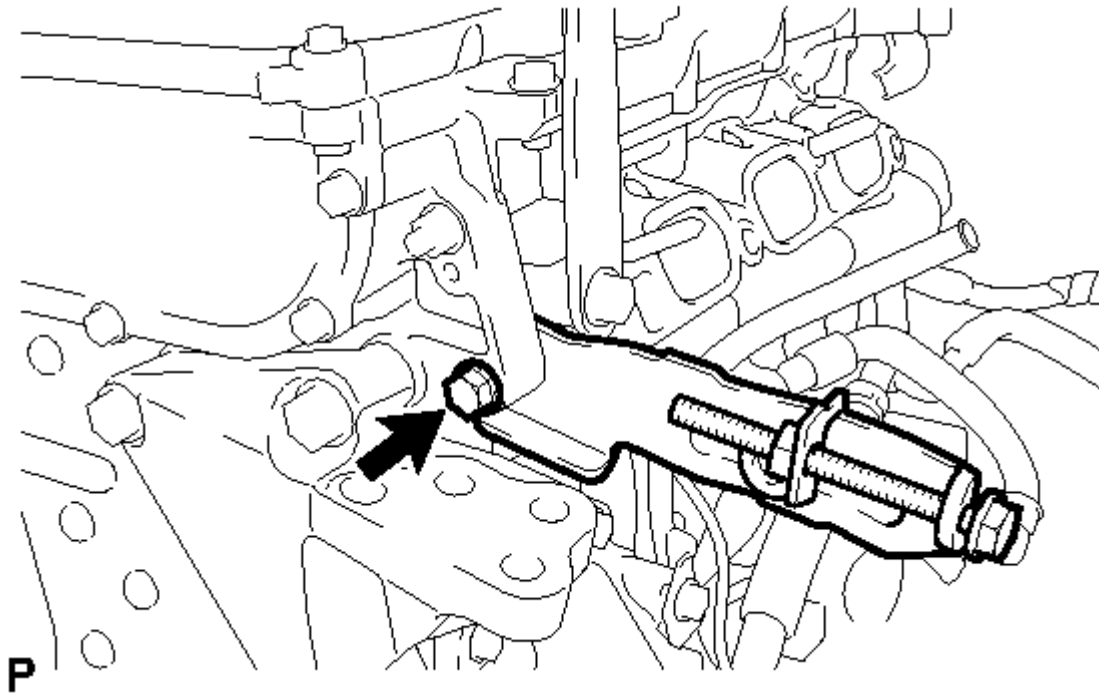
Identifying Fuel Delivery Pipe Bolts
